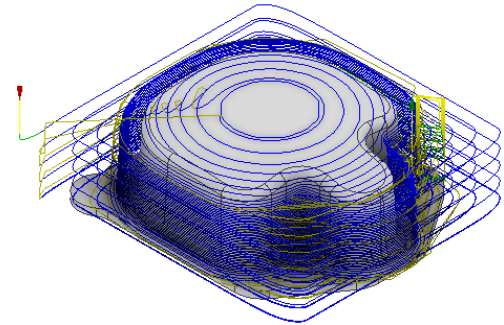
Toolpath generated using the Adaptive Clearing strategy for rough machining
